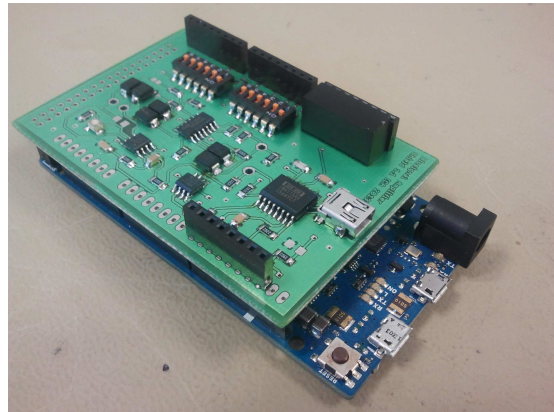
Assembled PCB of the bio-signal shield already connected to the ARDUINO® DUE micro-controller board.
